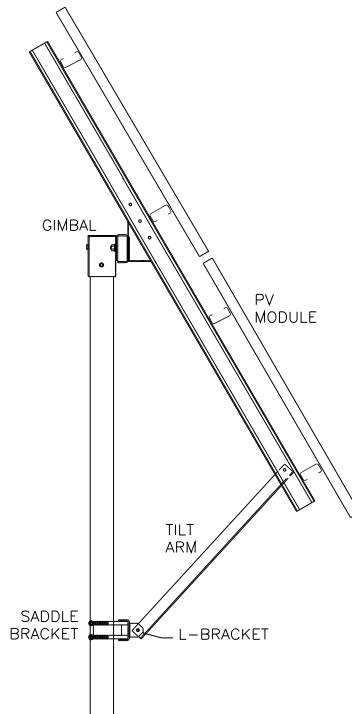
TOP OF POLE MOUNT TILT ANGLE ILLUSTRATION (50 – 130W)
